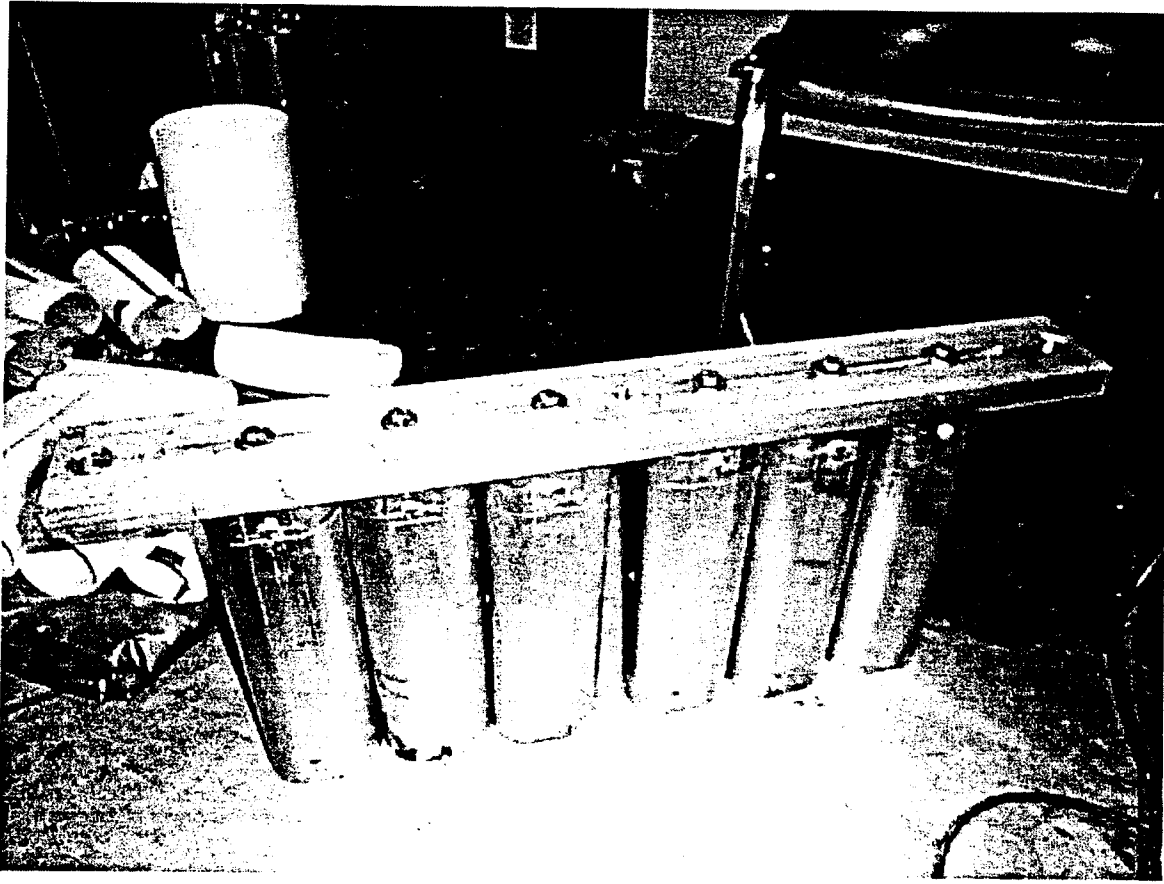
Aluminum bar with inner cell support blocks used in the outer shell support tooling.
